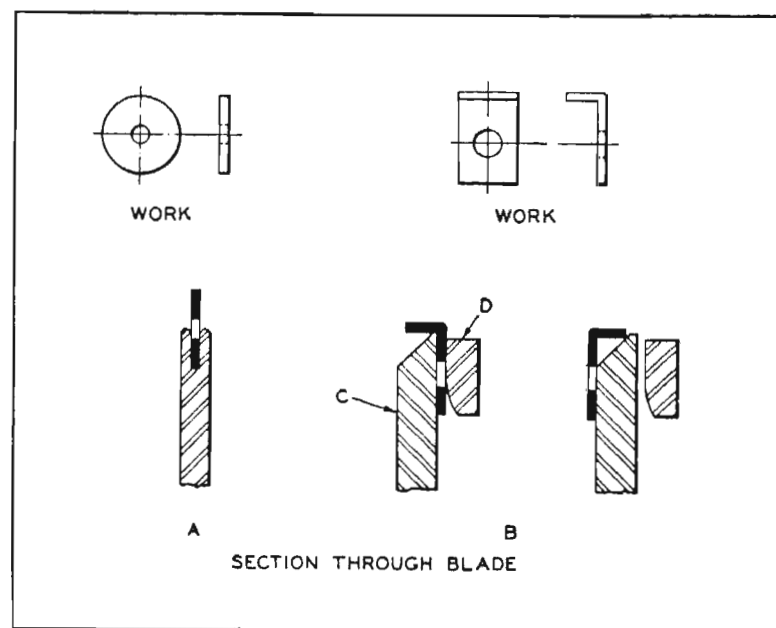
Blade Designs Used for Picking Up Parts in Centerboard Hoppers.
